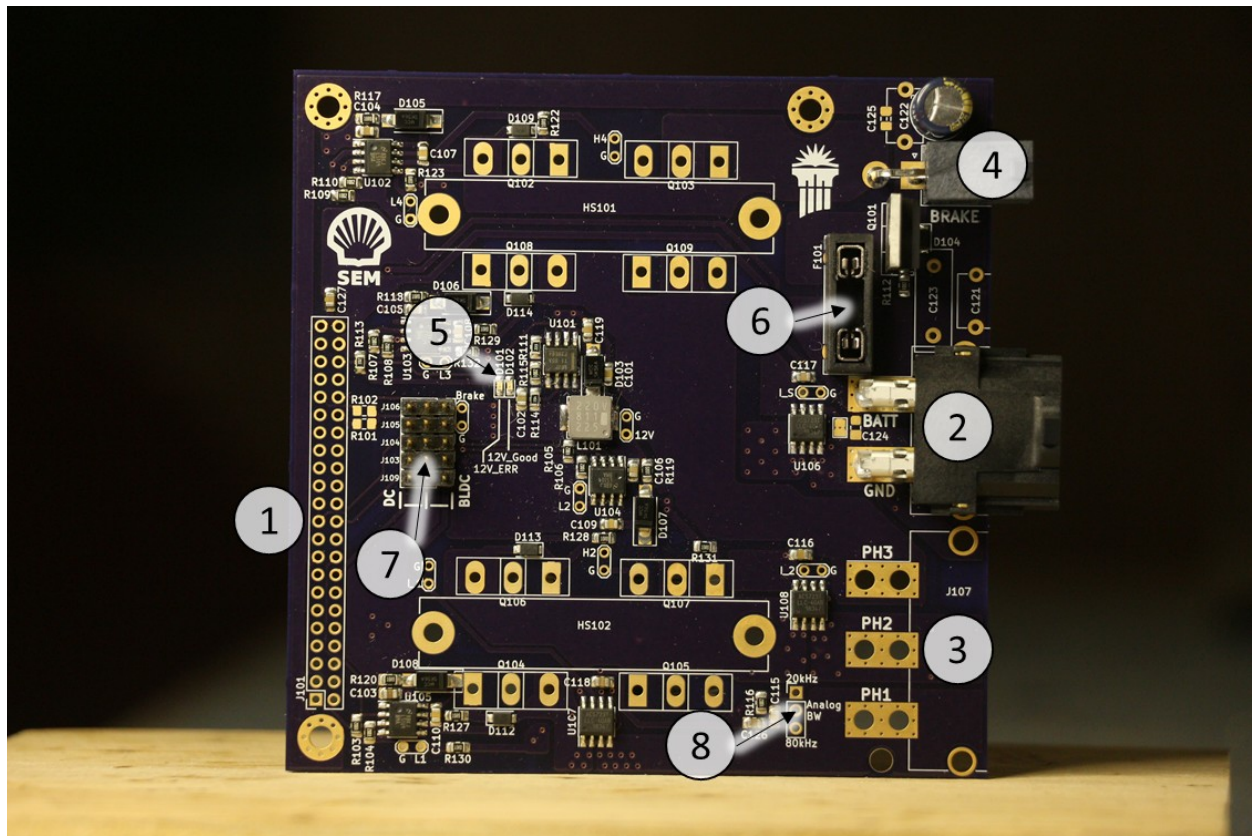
Power PCB front view (MOSFETs, heatsinks, motor connector J107, & header J101 removed)
